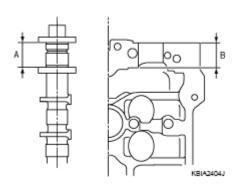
Identifying Camshaft Journal Dimensions Courtesy of NISSAN MOTOR CO., U.S.A.
